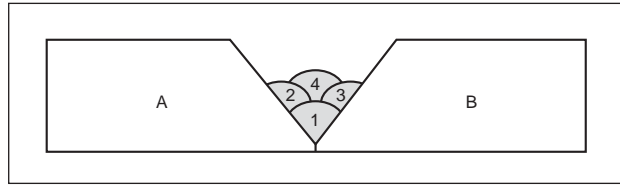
Multiple-pass dissimilar weld. Bead 1 is 15% A, 15% B, 70% filler metal. Bead 2 is 15% A, 15% Bead 1, 70% filler metal. Bead 4 is 15% Bead 2, 15% Bead 3, 70% filler metal.
